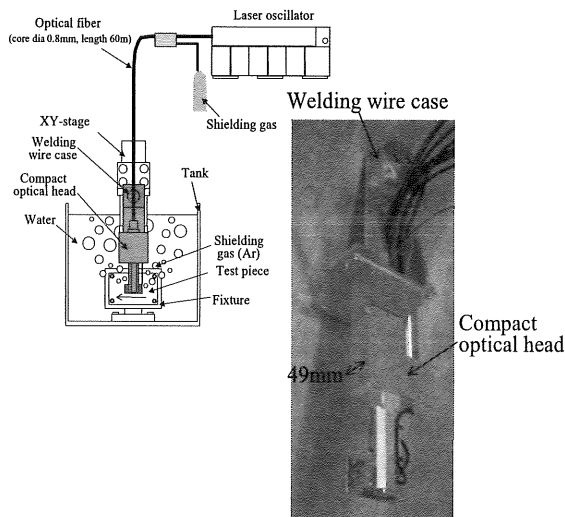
Schematic of experimental setup for Laser Seal Welding
